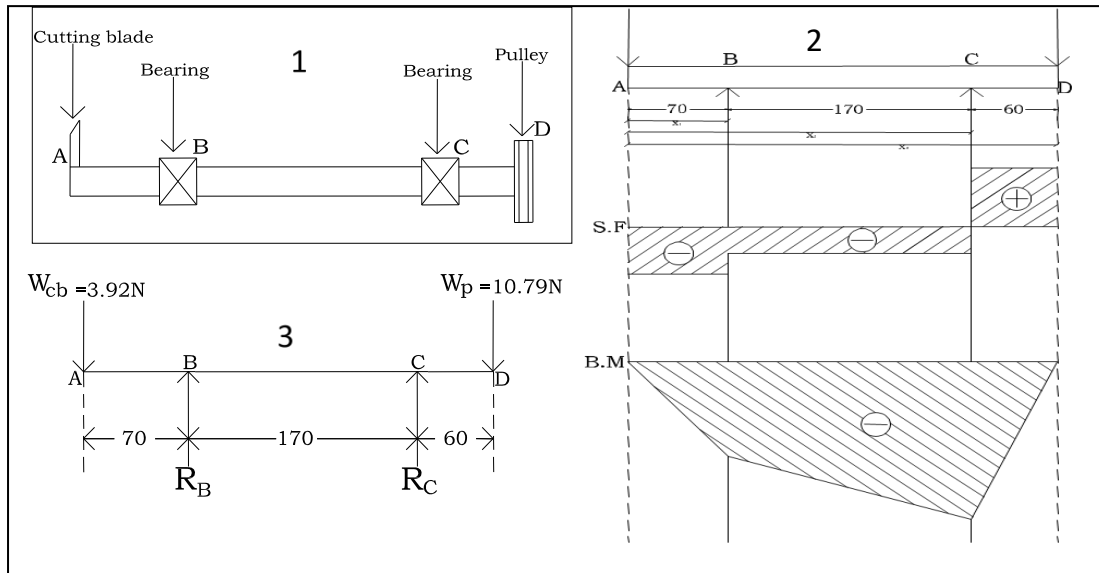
Load arrangement for the developed cassava tuber chipping machine (1) shaft, bearing, cutting blade and pulley assembly (2) Shear force (S.F) and bending moment (B.M) diagram (3) Moment about the bearing points.
